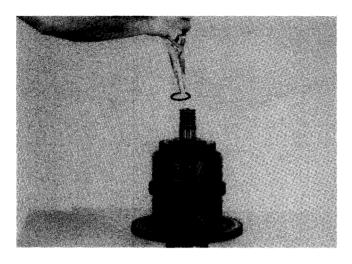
Remove clutch driven gear outer bearing retainer ring.
